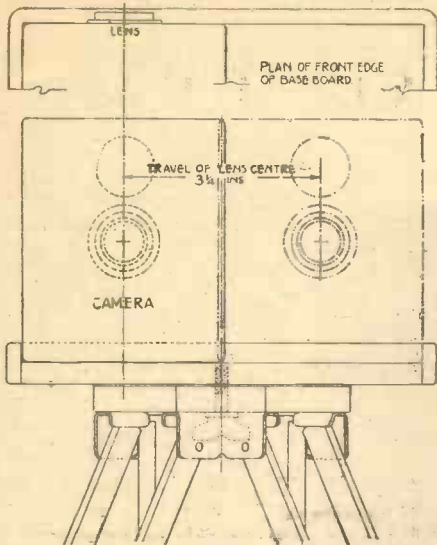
Using a box camera for taking stereoscopic pictures.
